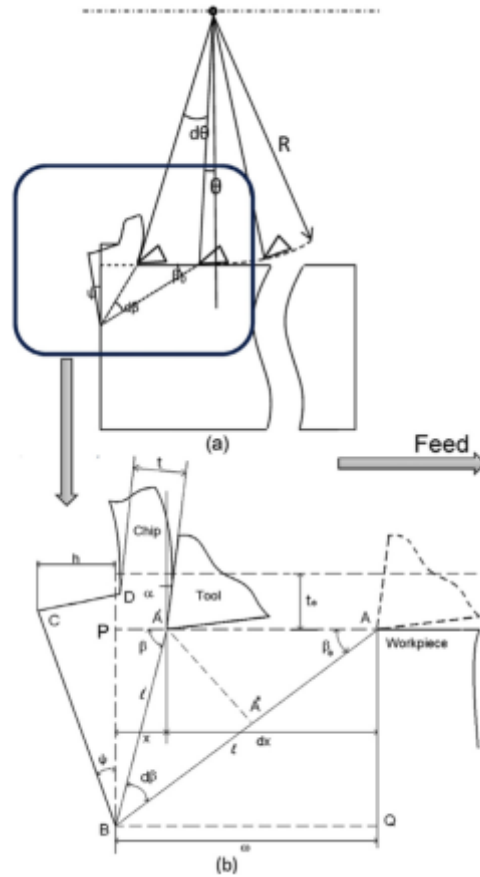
(a) Exit geometry in micromilling; (b) Geometry of burr formation [28]
